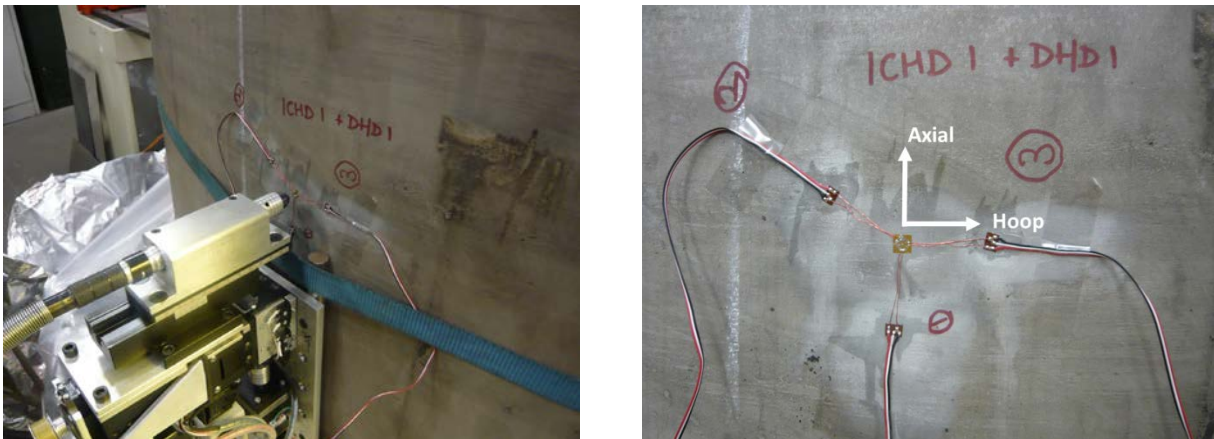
Mechanism used to perform iCHD measurements in the base metal (far from the longitudinal and circumferential welds). Drilling equipment is shown in (a) and the orientation of the strain gauge relative to the axial and hoop directions is illustrated in (b).
